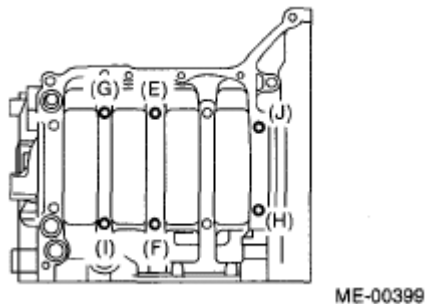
Identifying Tightening Sequence Of Cylinder Block Connecting Bolts
